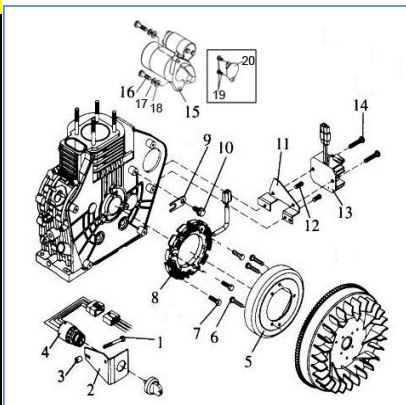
Starting Motor & Flywheel Alternator Assembly
